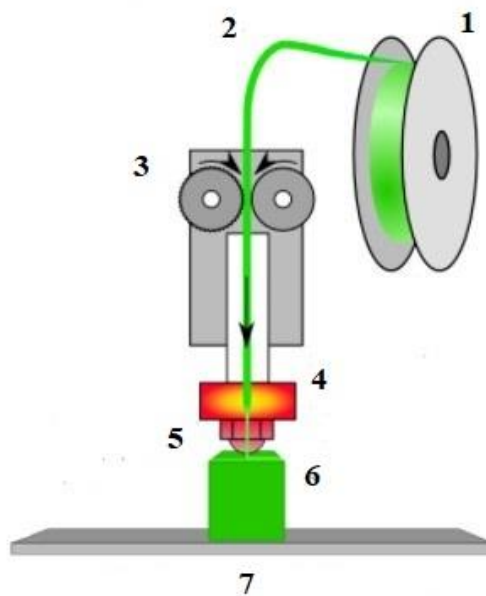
Simplified diagram of the FDM technique: 1- filament spool, 2- filament, 3- extruder, 4- heater block, 5- nozzle, 6- piece and 7- bed. [24]. The filament is led into the extruder, melting and being extruded into the bed, in the desired x/y/z position.
